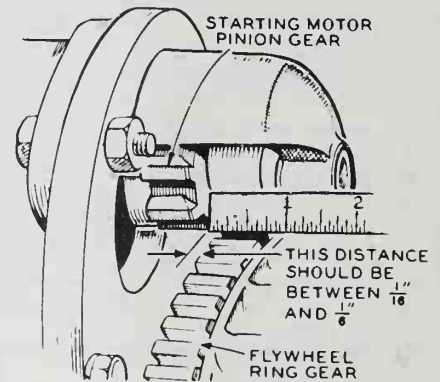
Check starter pinion to ring gear clearance as shown. Adjustment details in text.
